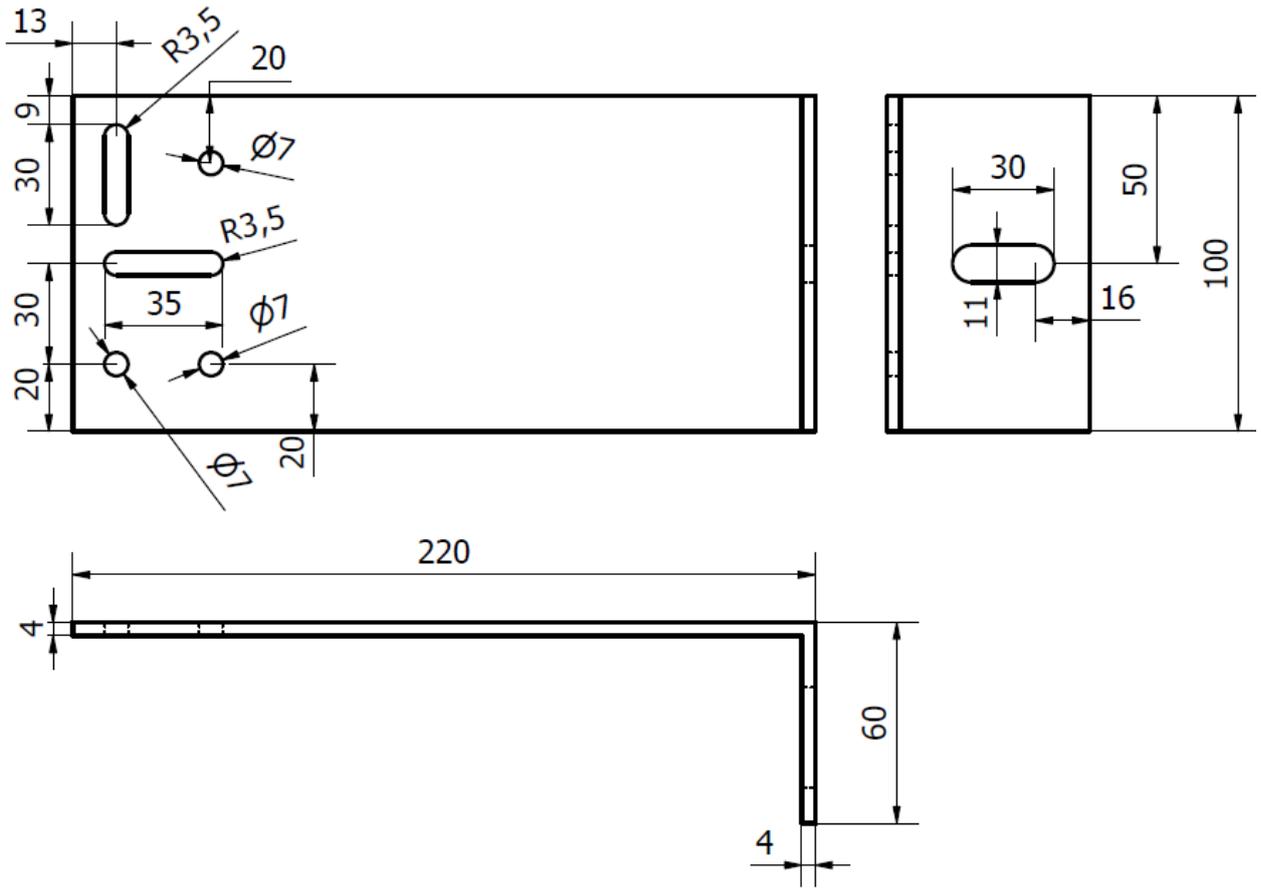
Support and fixing bracket CRM.01 – 220 mm
